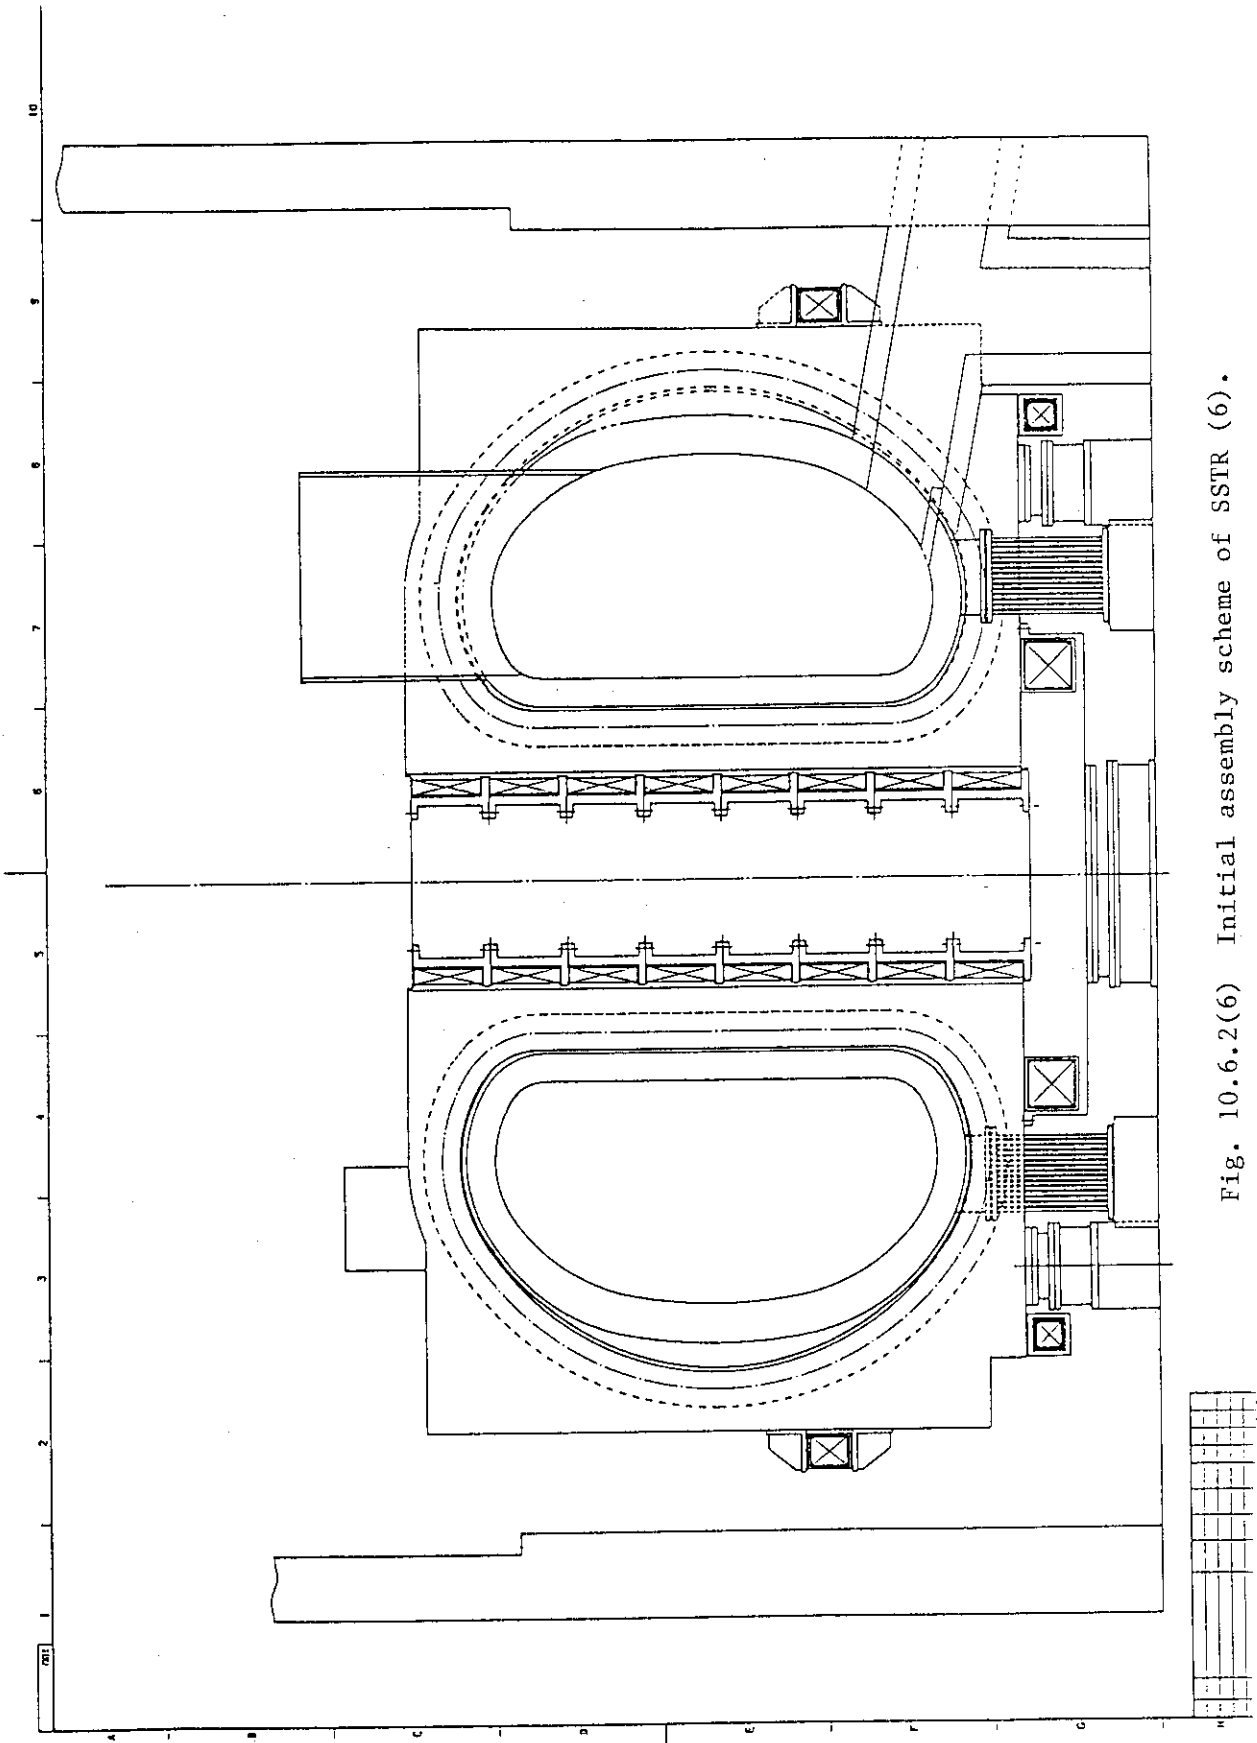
(6) Initial assembly scheme of SSTR (6).
